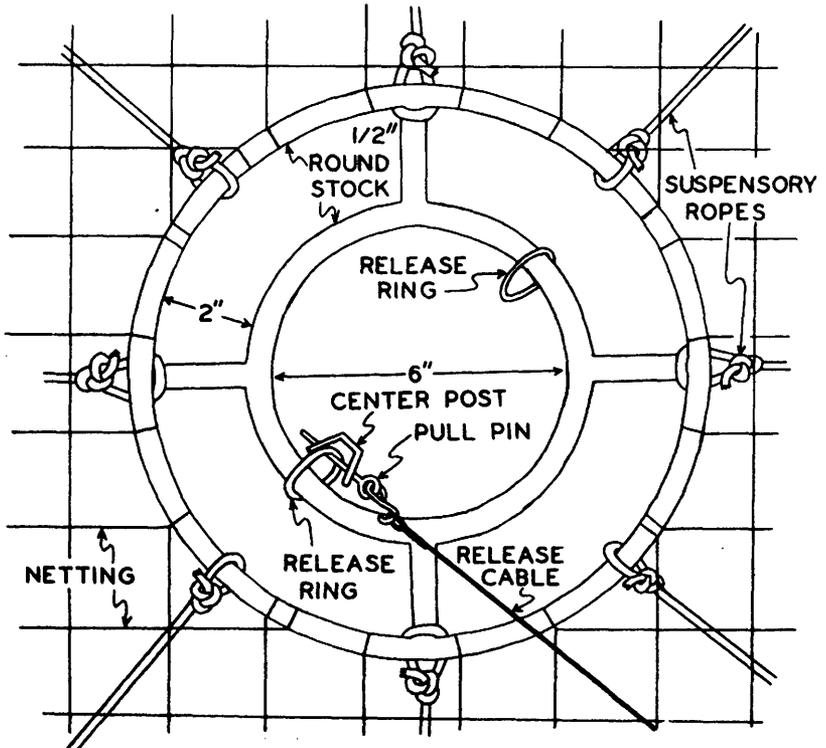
Drop-net trap, assembly detail Center Ring Assembly.
